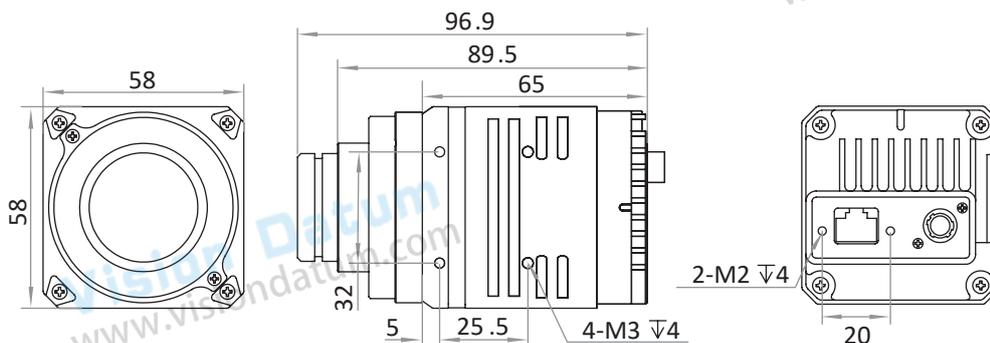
Mechanical Dimensions (in mm) of the GigE Cameras with 25mm focal length lens housing (The installation uses M2 and M3 screws).
